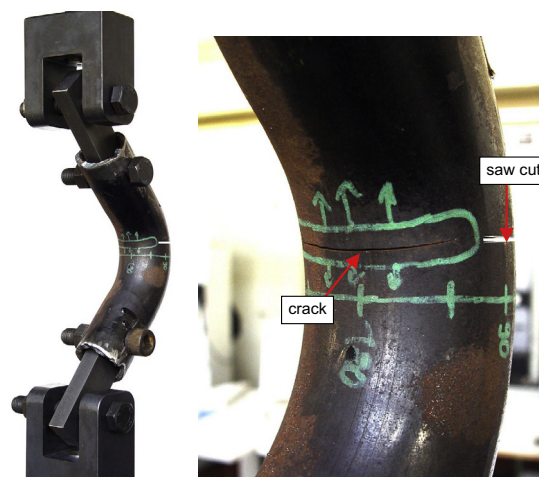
Opening of a cracked pipe bend in the lab using a servo-hydraulic testing system.
